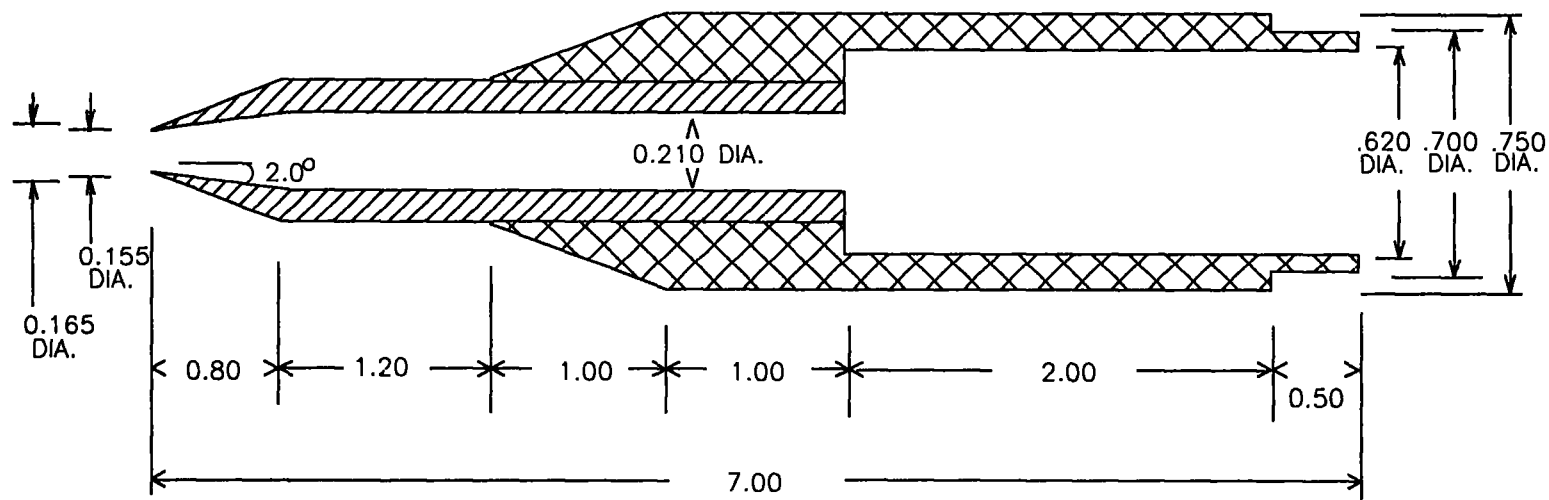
Detailed Drawing of Dehne 2 Probe.
